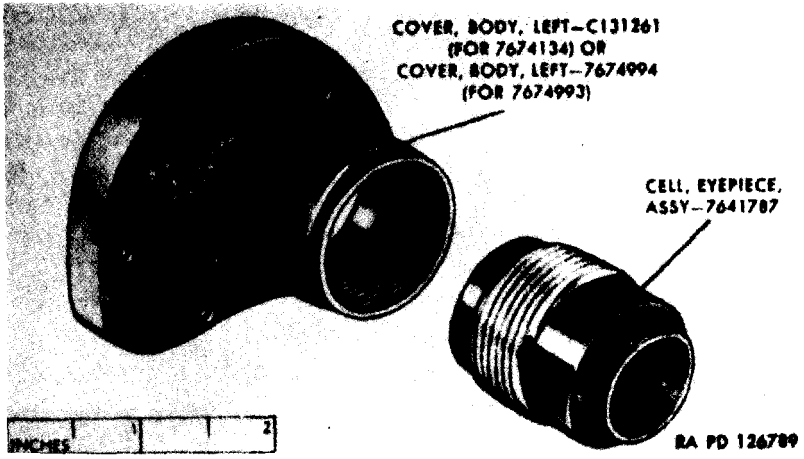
Left body cover assembly 7674134 (M13) or 7674993 (M13A1) - exploded view.
